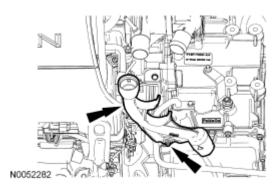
Locating Upper Radiator Hose, Lower Radiator Hose & Heater Hoses Courtesy of FORD MOTOR CO.
